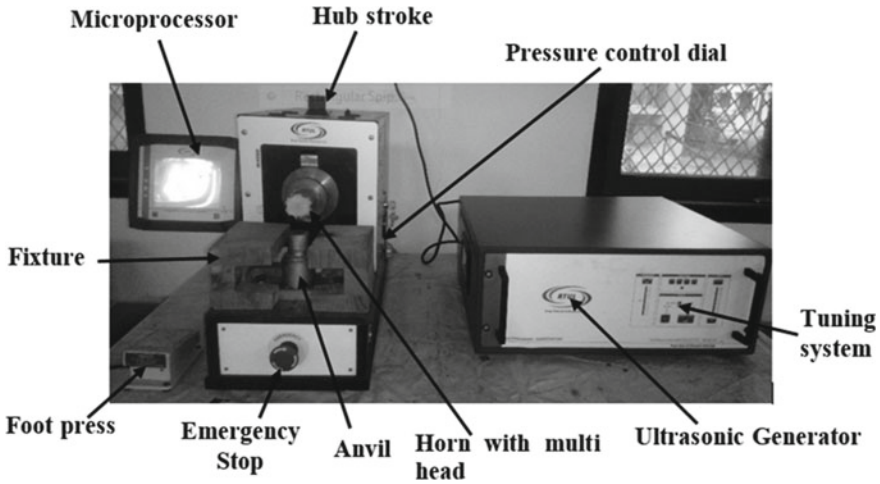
Ultrasonic Metal welding setup
